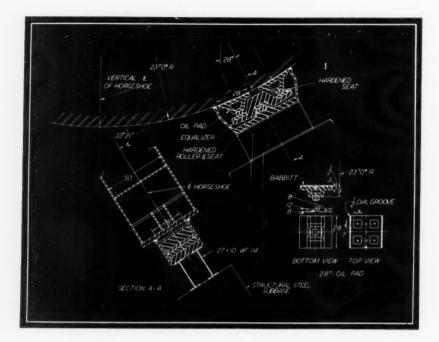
Oil pad bearings as shown can adjust themselves to local deflections
